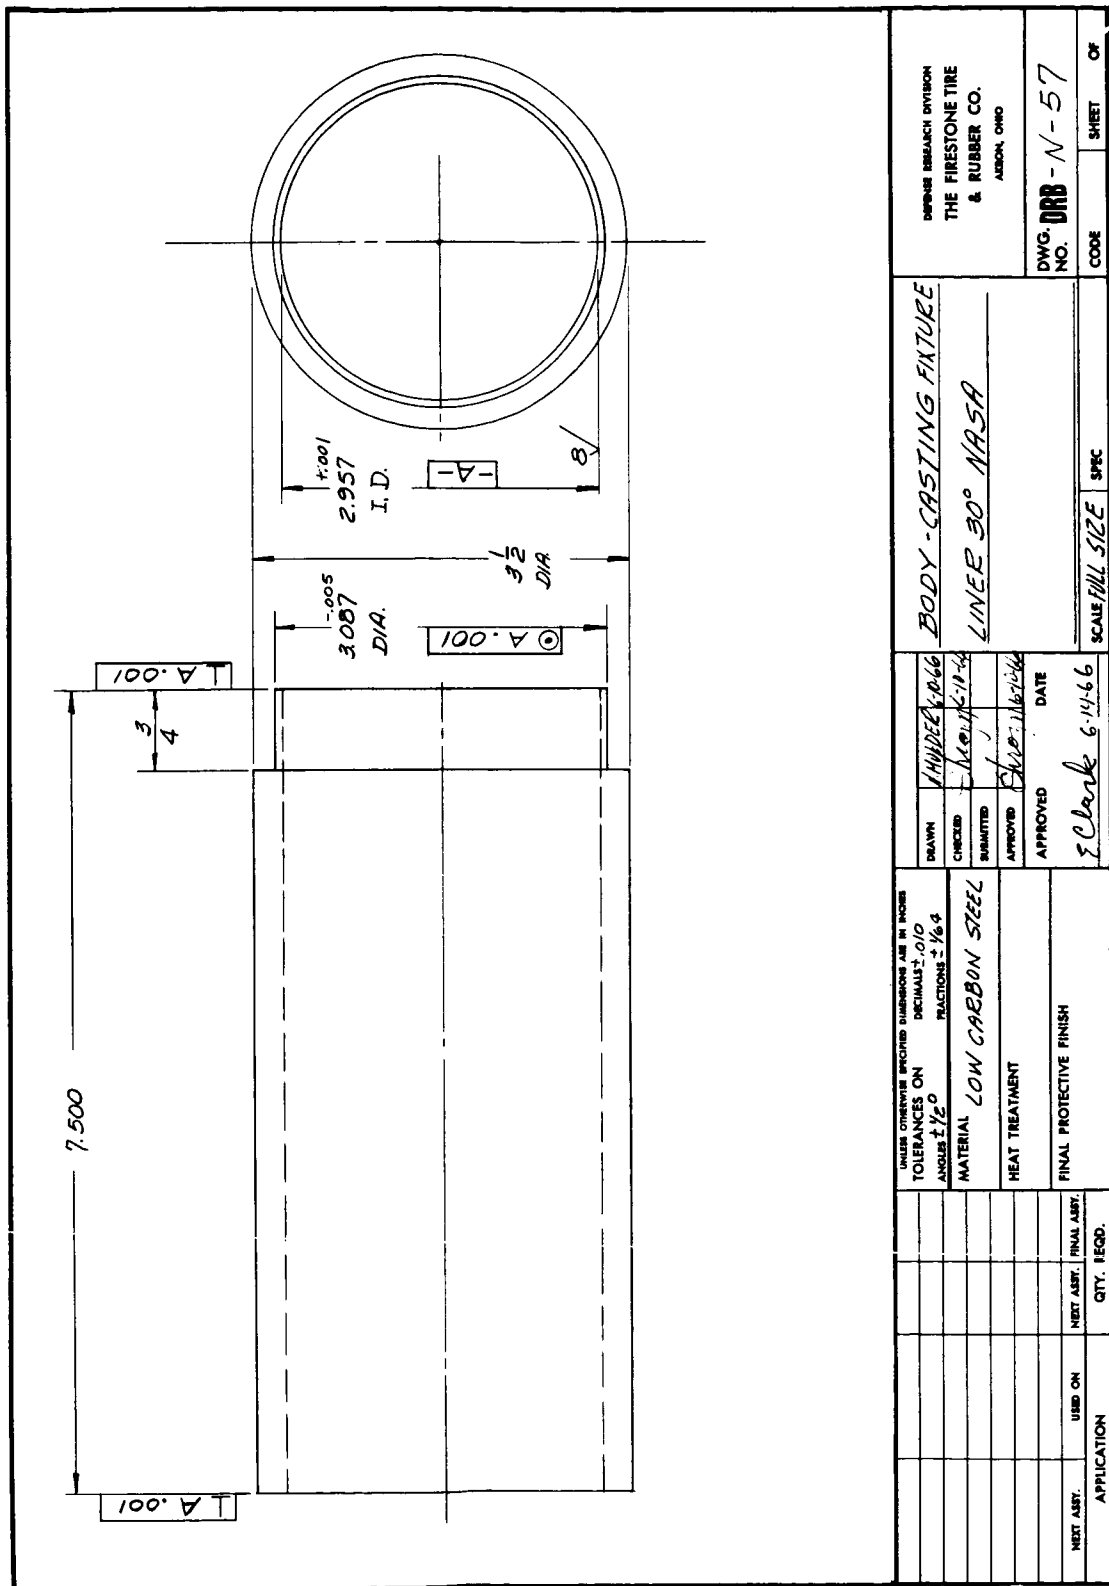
Body, Casting Fixture. 30° NASA Liner. DRB-N-57
